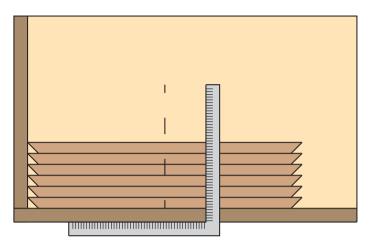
The marking frame: a simple jig for marking out mouldings of uniform length
